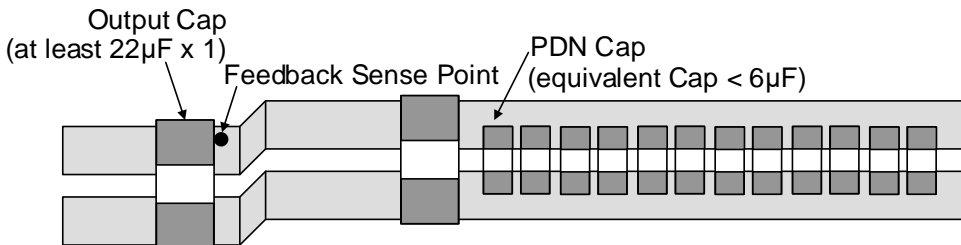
PCB Layout Guide for WL-CSP-15B 1.31x 2.02 (BSC) package
